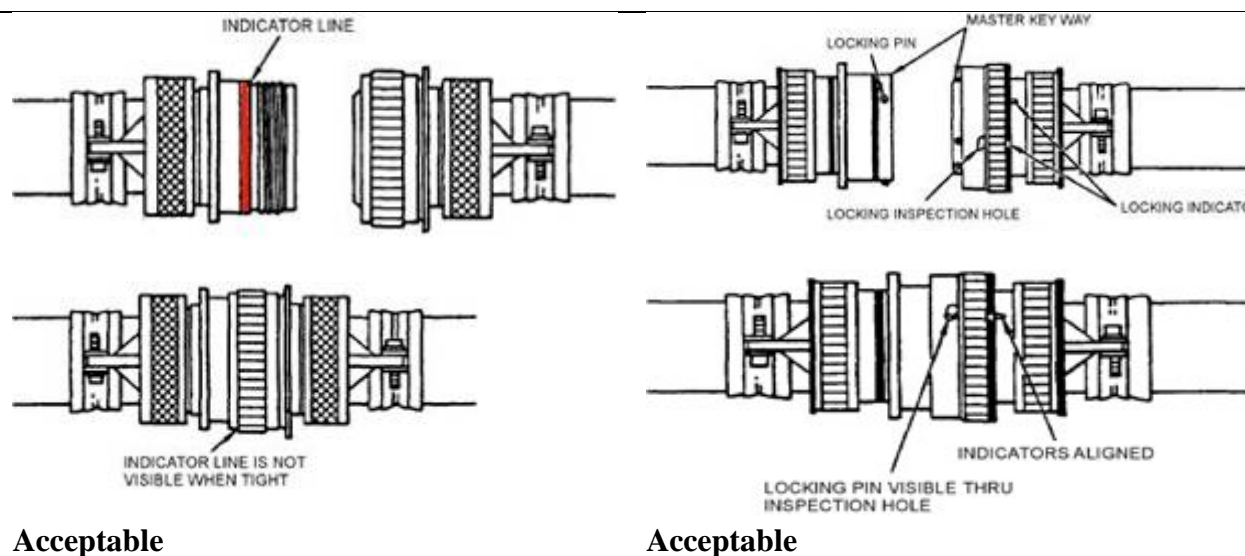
Example of correctly mated connectors using an indicator line and locking pin with inspection hole.
